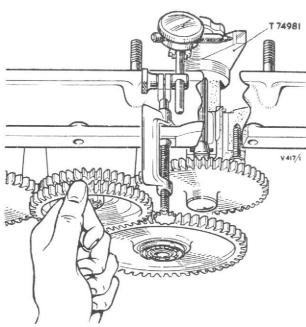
Checking the backlash between the generator drive gear and the idler gear
